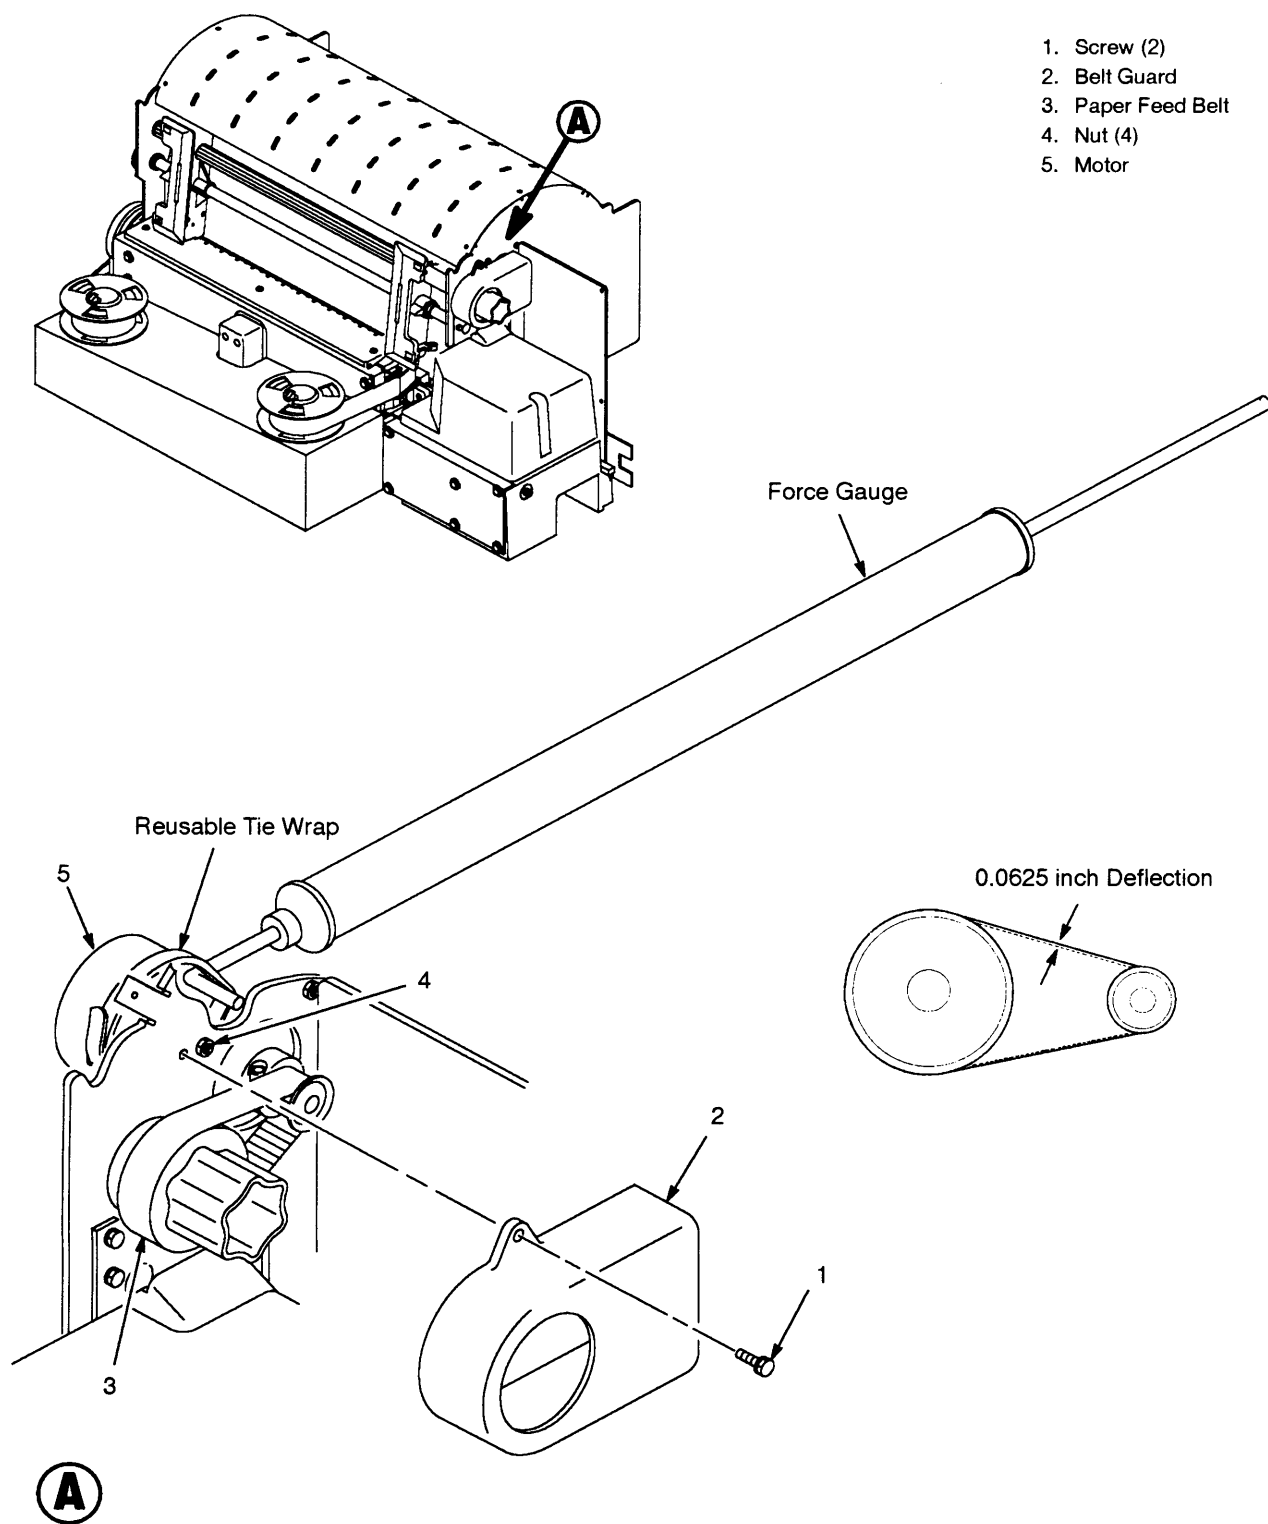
Paper Feed Belt Tension Check and Adjustment
